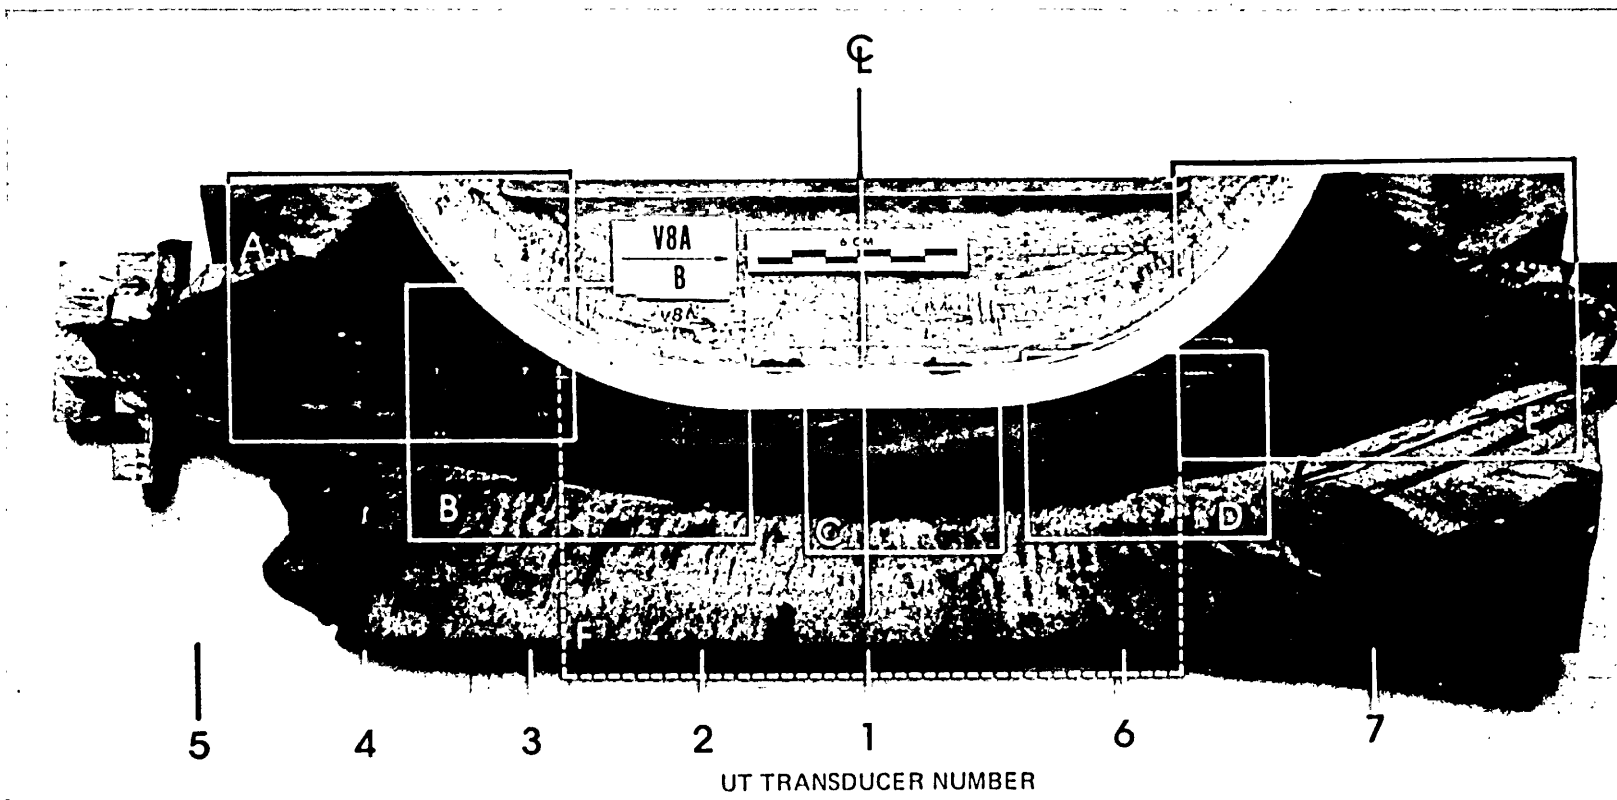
Photograph of the composite of fracture surface B. The arrow points toward the vessel closure. Areas shown in more detail in subsequent figures are identified here. Lighter areas are brittle fracture zones generated in breaking the block.
